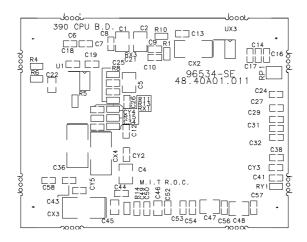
PCB No. 96534-SE CPU Board Layout (Top)
